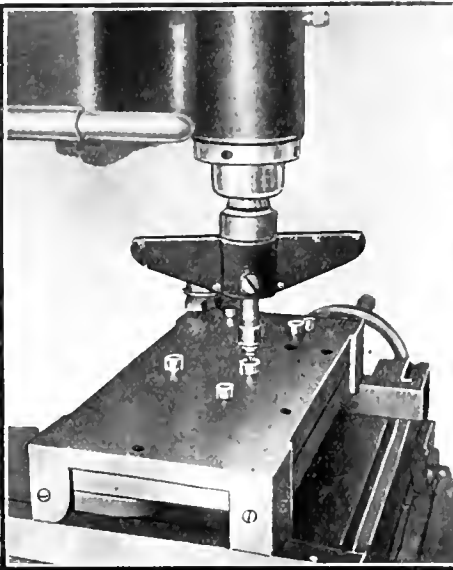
Indicating the Concentricity of a Jig Button with the Spindle.
